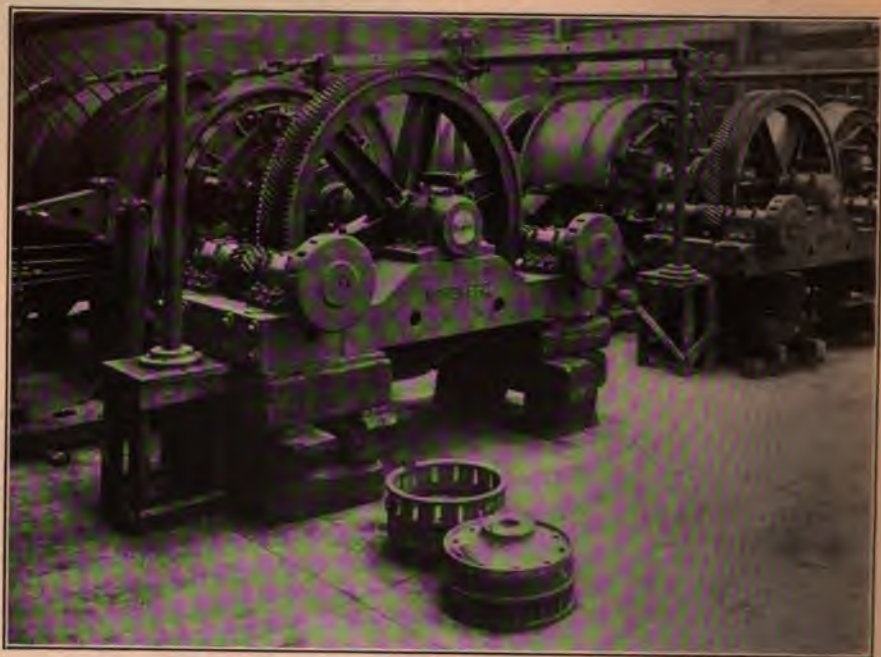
Shop View of Hoists to be Installed Underground at Mineville.
